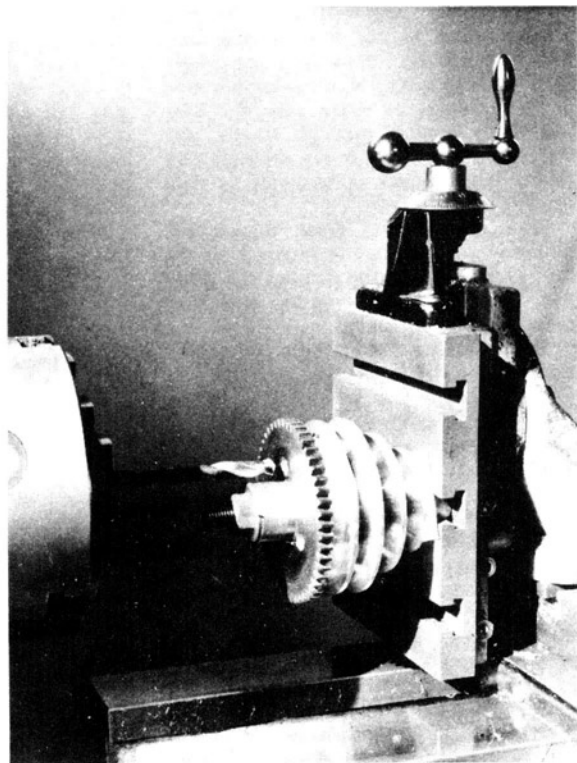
Jig-drilling the pulley face for the back gear driving pins.
